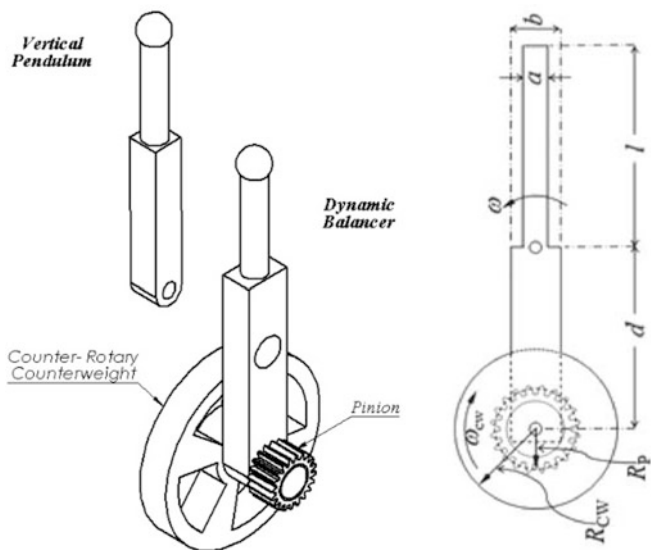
A design for the dynamic balancer: (a) Mechanical design layout. (b) Design parameters
